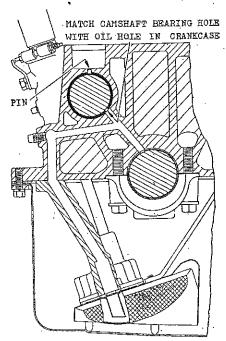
Installing camshaft bearings on 239, 257, 286, 331, 400 and 450 engines
